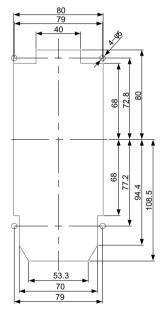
Sheet metal slot dimensions (unit: mm)
